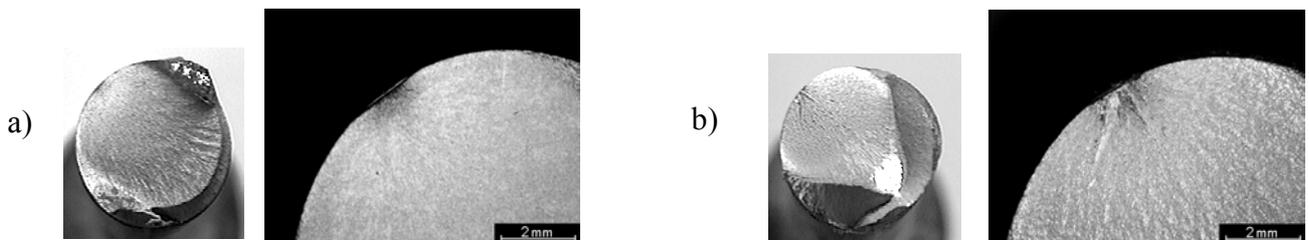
Macroscopic appearance of fracture surfaces. $\Delta\sigma = 698$ MPa. a) without torsion; b) with torsion
